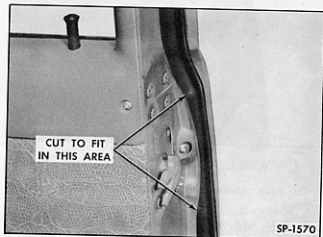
Weatherseal Installation at Door Lock (2-Door Styles)
